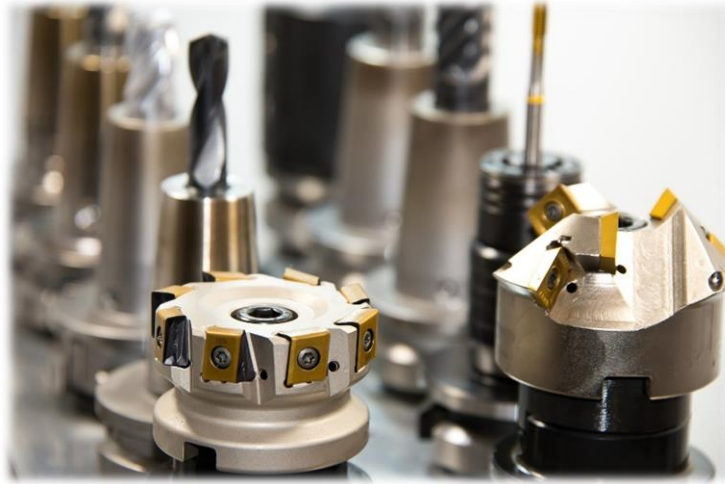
An image showing two milling tools with inserts (Schwarzenberger, 2014)
